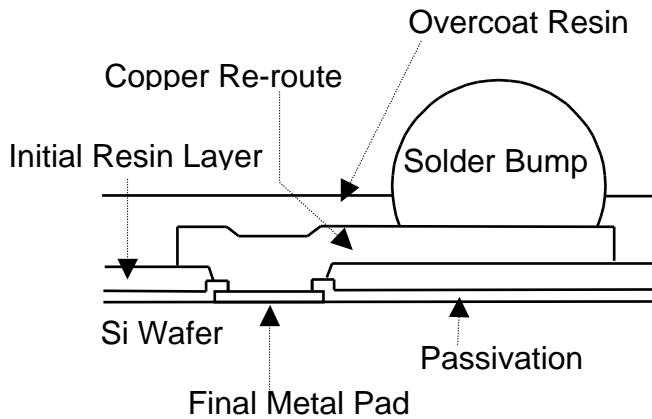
Schematic cross-sectional view of re-routed solder bump design.
